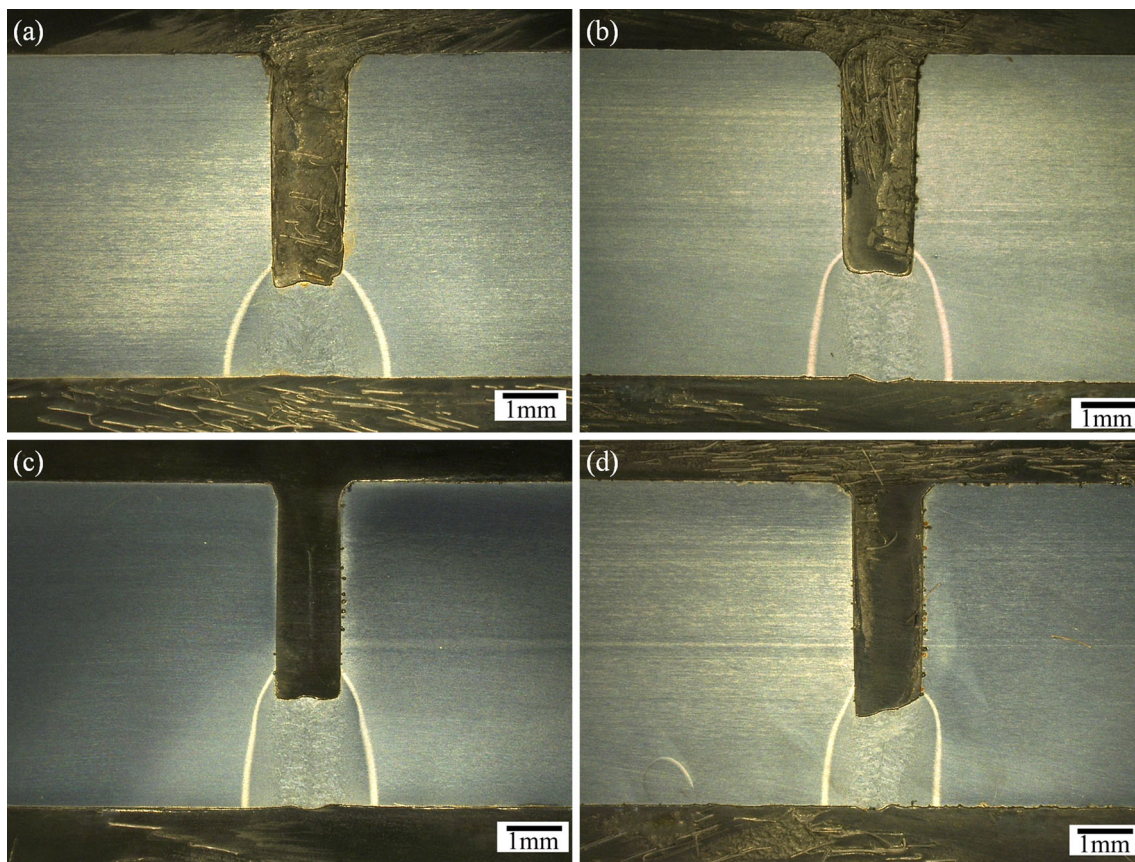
Cross sections of the root pass welds for 6 mm thick S960 steel plates at different welding speeds: a 20 mm/s (1.2 m/min); b 25 mm/s (1.5 m/min); c 30 mm/s (1.8 m/min); and d 35 mm/s (2.1 m/min)
